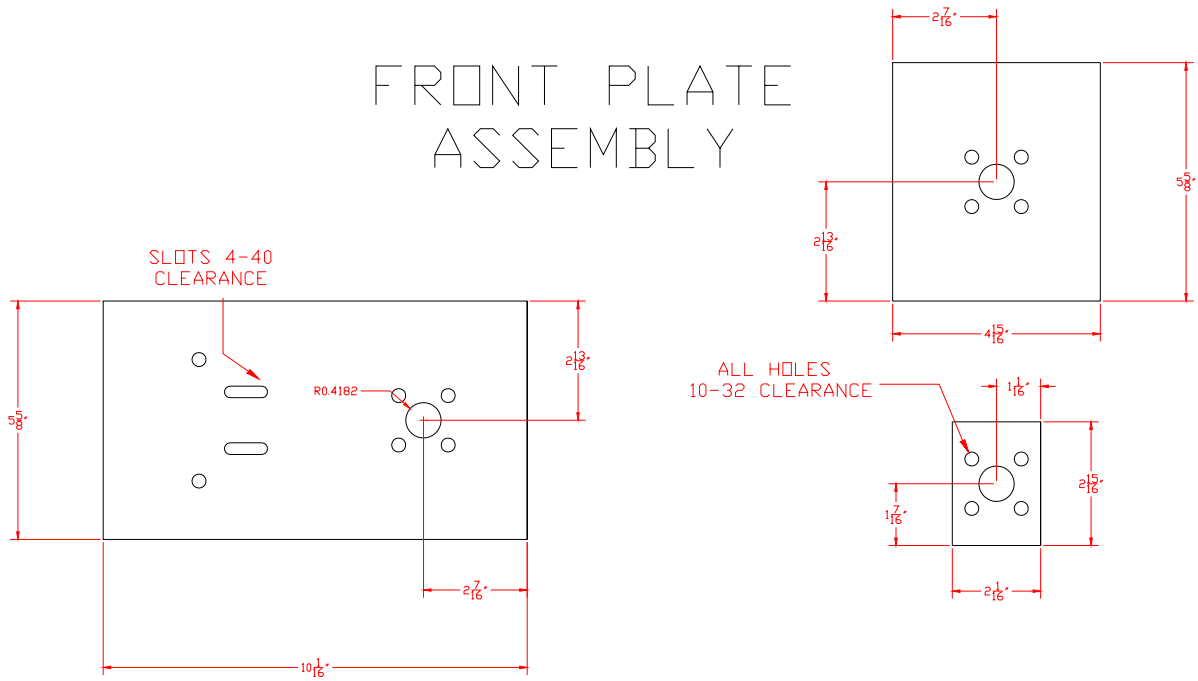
Schematic for Motor/Sensor/Drive Shaft Assembly
